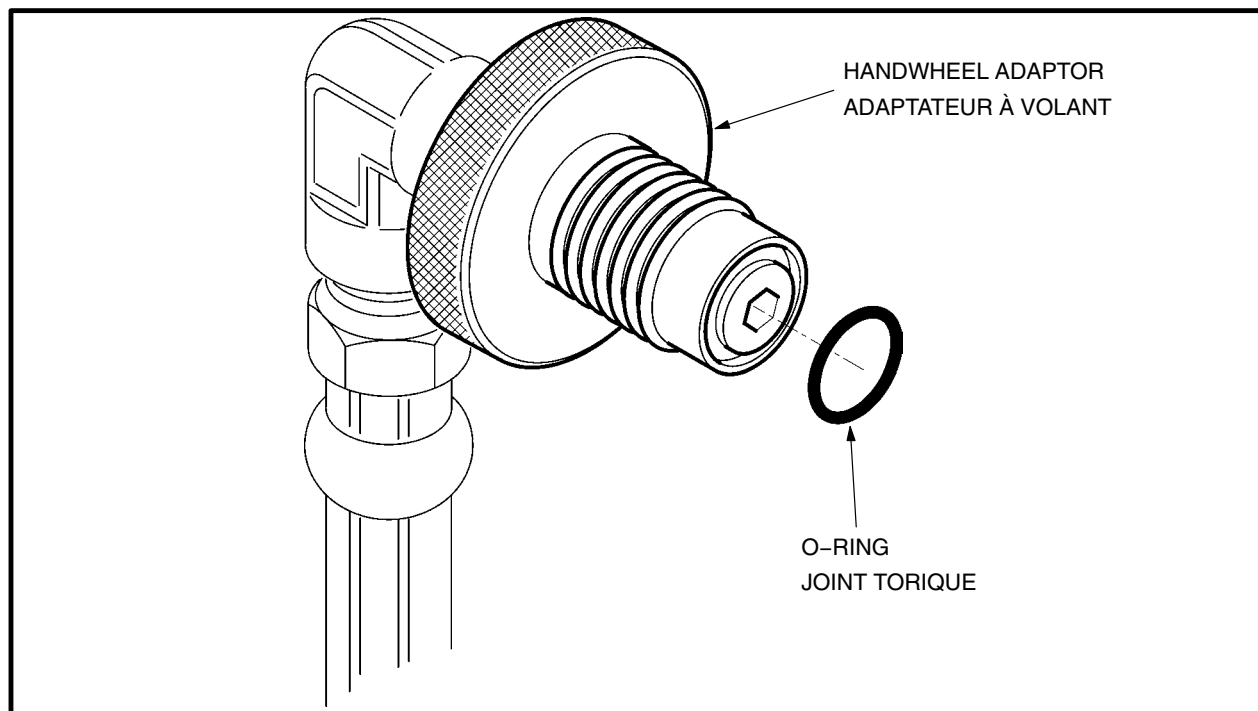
Handwheel Adaptor and O-ring Assembly
